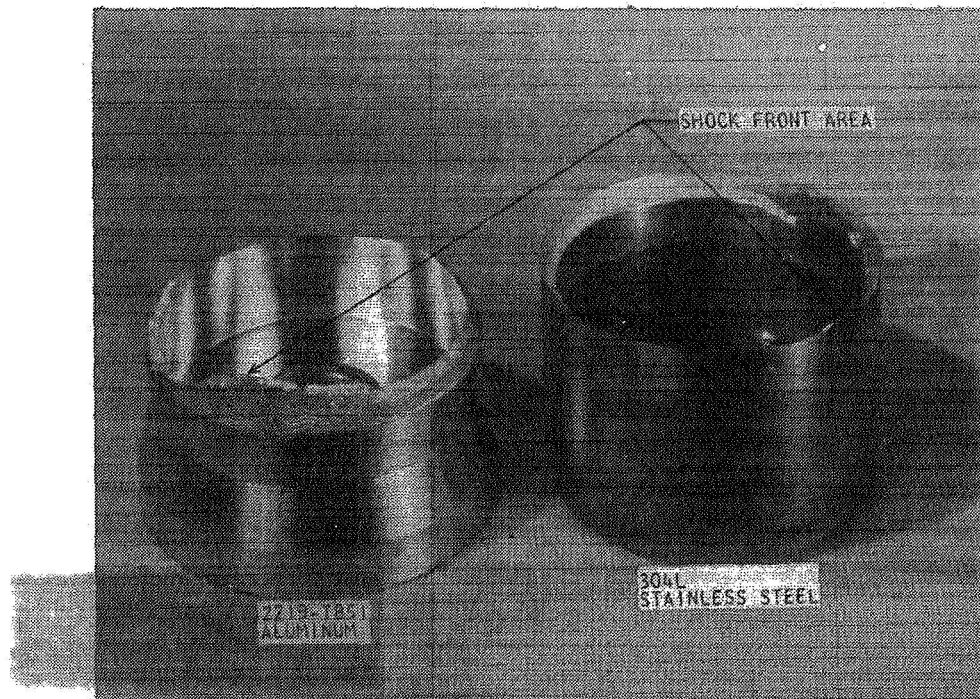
Explosive Welded Joint Burst Failure After Separation
